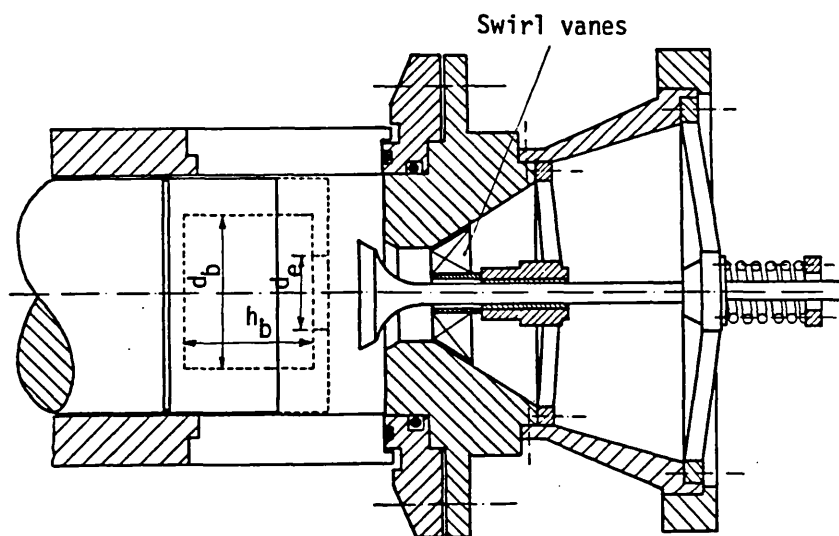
Diagram of the piston-cylinder assembly with the swirl-producing intake port configuration
